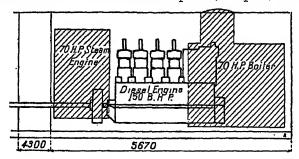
Saving in Space effected by substituting High-speed Diesel Engine for Steam Machinery.
